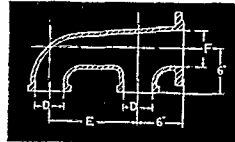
/8/9. Headers connecting flanged outlets of two alternate sections of Nos. 2, 3 and 4 Boilers.
